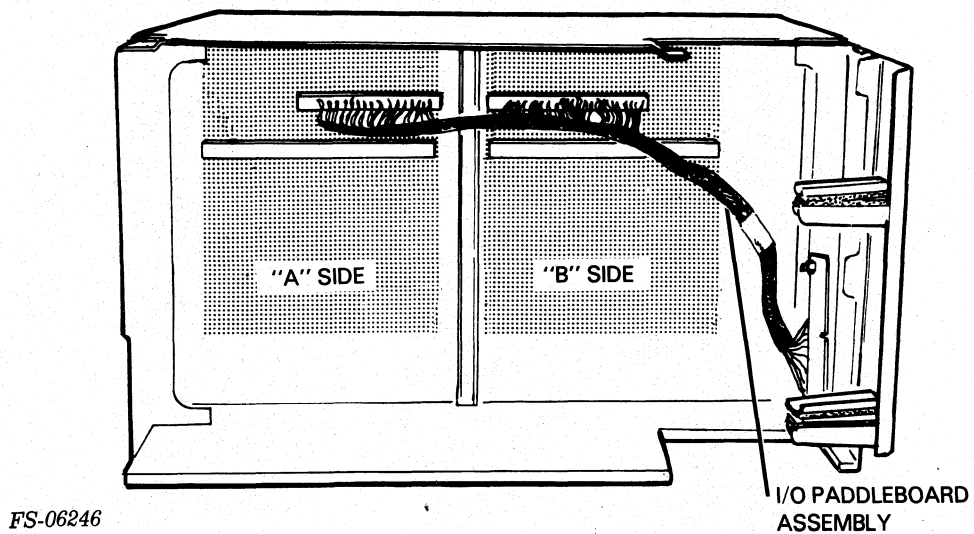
Edge Connectors with Side Mounted Paddleboards
